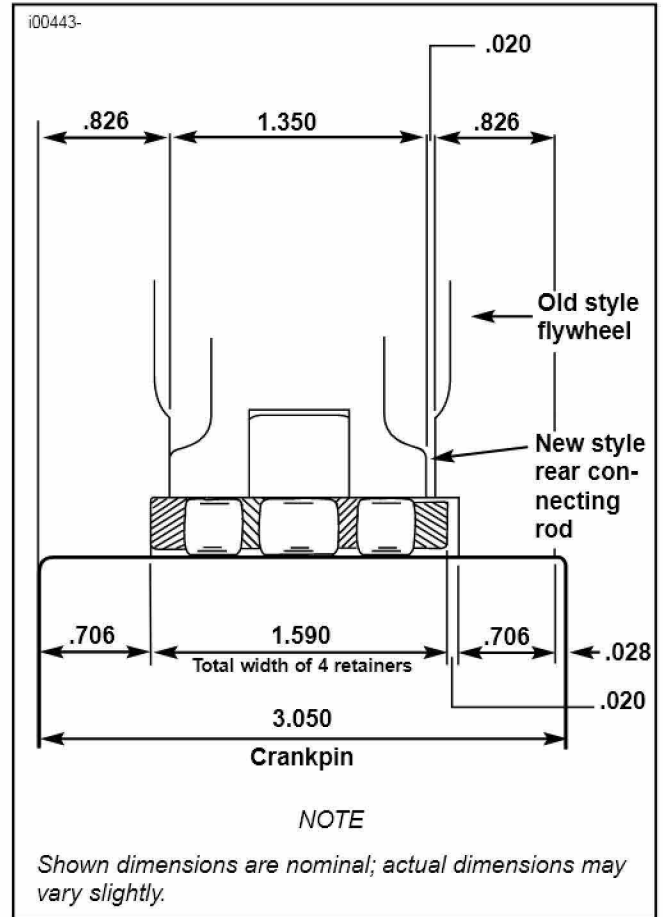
Dimensions for 1989 rear connecting rod (P/N 24325-88R) when used with Pre 1989 crankpin, rod bearing and flywheels (width of Pre 1989 rear connecting rod is 1.370)
